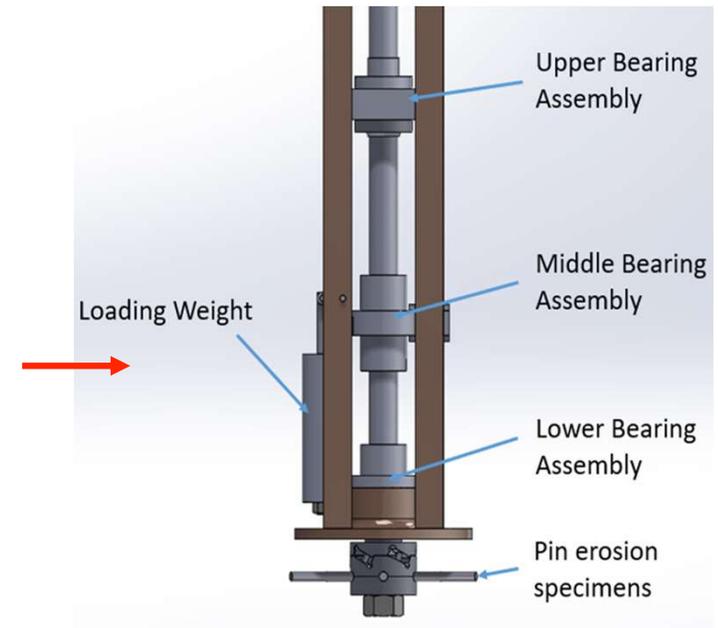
B. The Tribology Test Bed inner column assembly features three bearing assemblies and a hub for pin specimens
